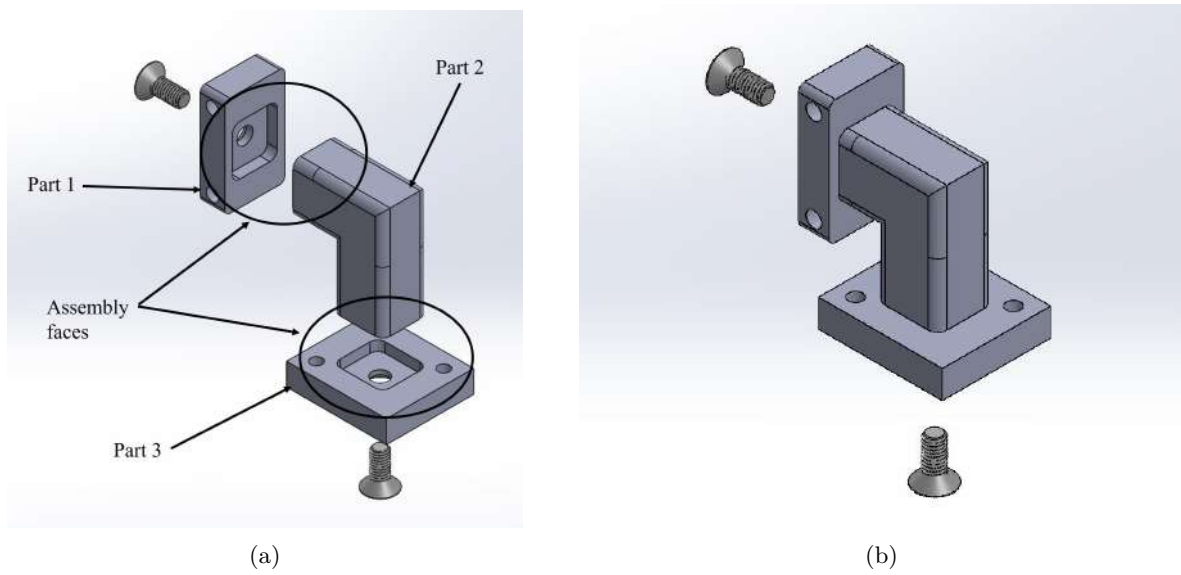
Assembly sequence of the L arm. (a) The assembly face on part 2 will penetrate the grooves present on both parts 1 and 3. (b) The separated parts are fixed together with socket countersunk head screws.
